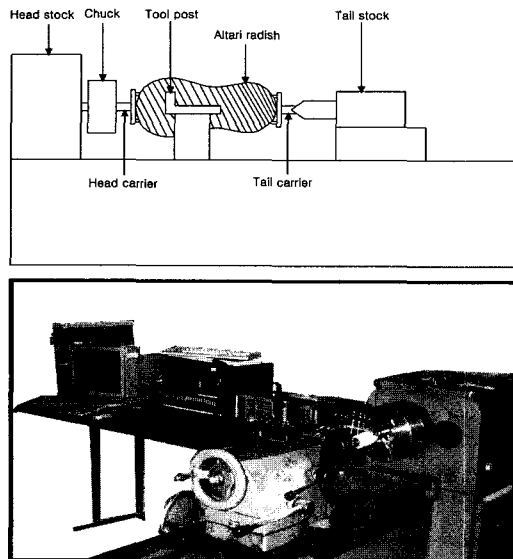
Drawing and photograph of the experimental apparatus for circumferential peeling of the Altari radish using lathe.
